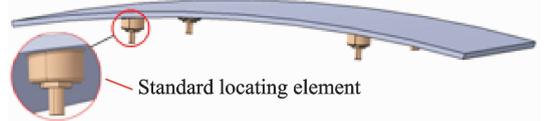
Final fixture locating layout of ATWC after reconstruction
